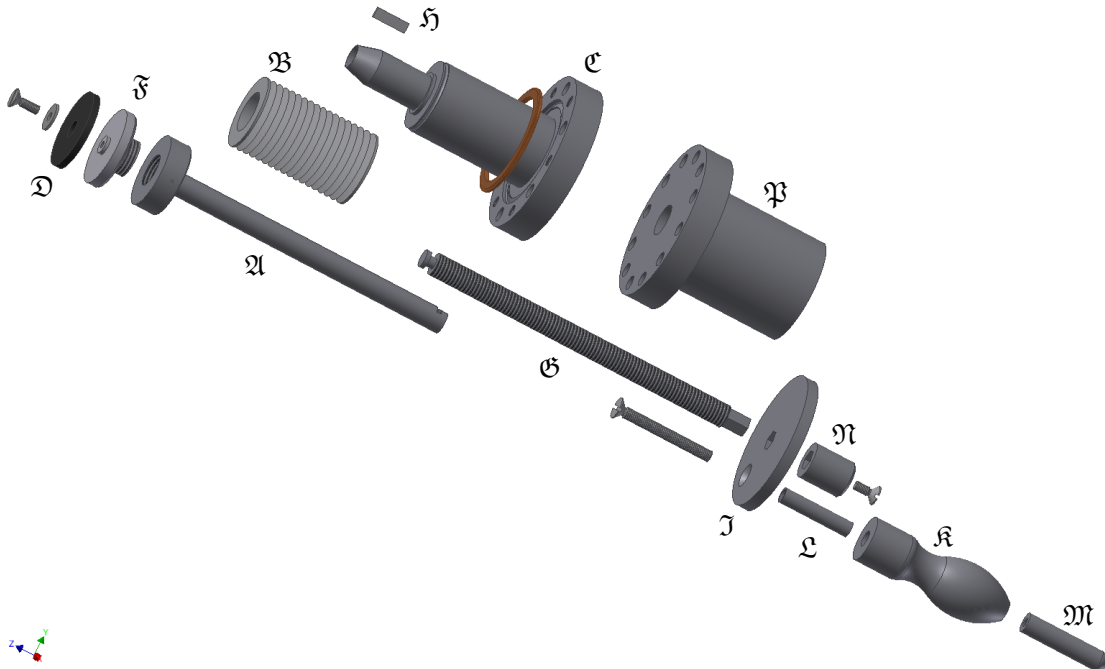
Assembly of the Molecular Beam Valve — The bonnet of the valve comprises a moveable seat (A) for different gaskets, an edge welded bellow^a (B) and a base flange (C). This figure shows the currently used option with a Viton[®] gasket (D) on an adapter plug (E). A conical end stop guides the bellow on the base flange (C) and prevents it from excessive compression. The linear actuator (A) is driven by a threaded rod (G) latched into its air side in order to transfer pushing and pulling forces. This shaft (A) is guided by a parallel key (H) to prevent torque on the bellow. The spindle (G) is turned by a hand wheel (I) equipped with a handle (K) and the corresponding spacer pieces (L, M). Defined torque can be applied by a nut (N) mounted to the hand wheel (I). The thread in the holder (P), which is mounted on the bonnet flange (C), converts the rotation to linear motion. The seat of the valve is implemented in the housing (not shown, see Figure 2.29) of the molecular beam.
